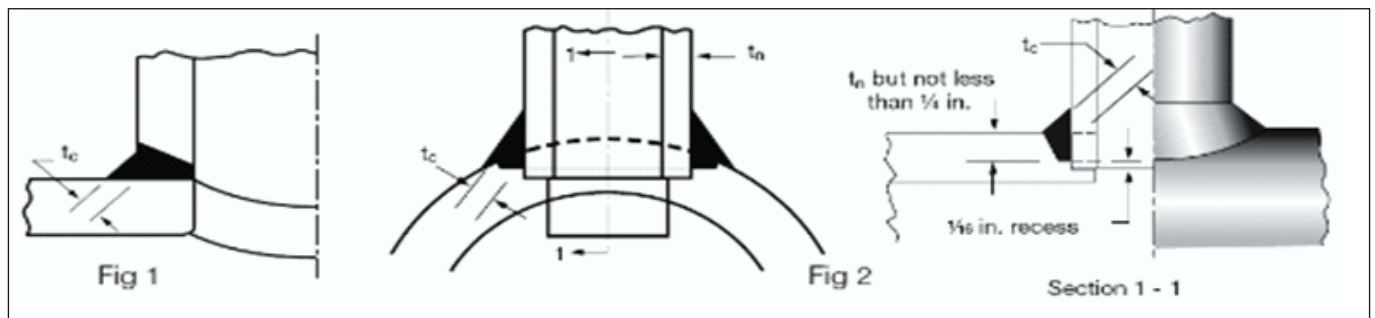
&2 - Full Penetration Groove Design and Partial Penetration Groove Design
